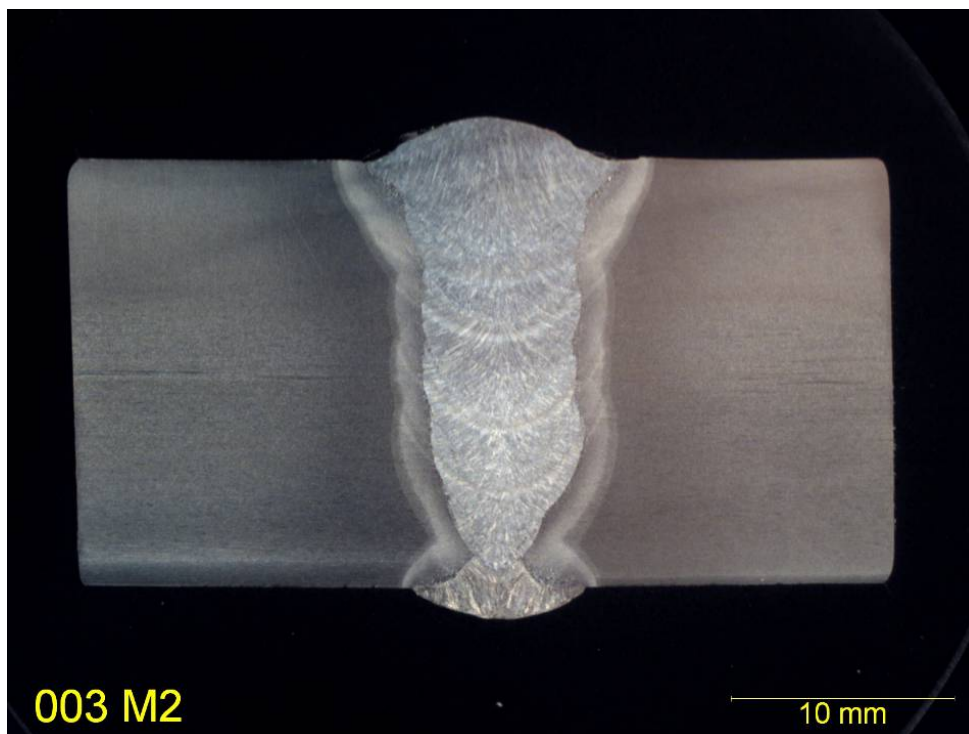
Photo-macrograph Showing Cross-section of Weld A3
